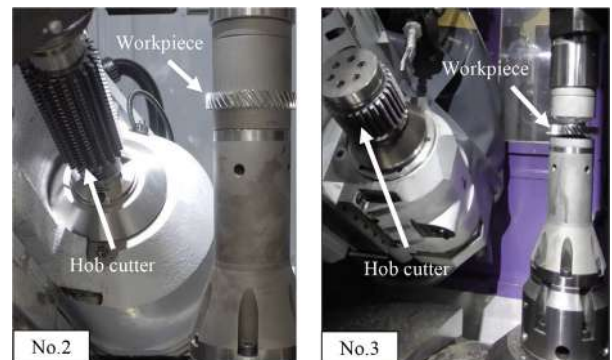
Photographs of gear hobbing machine Nos. 2 and 3.
